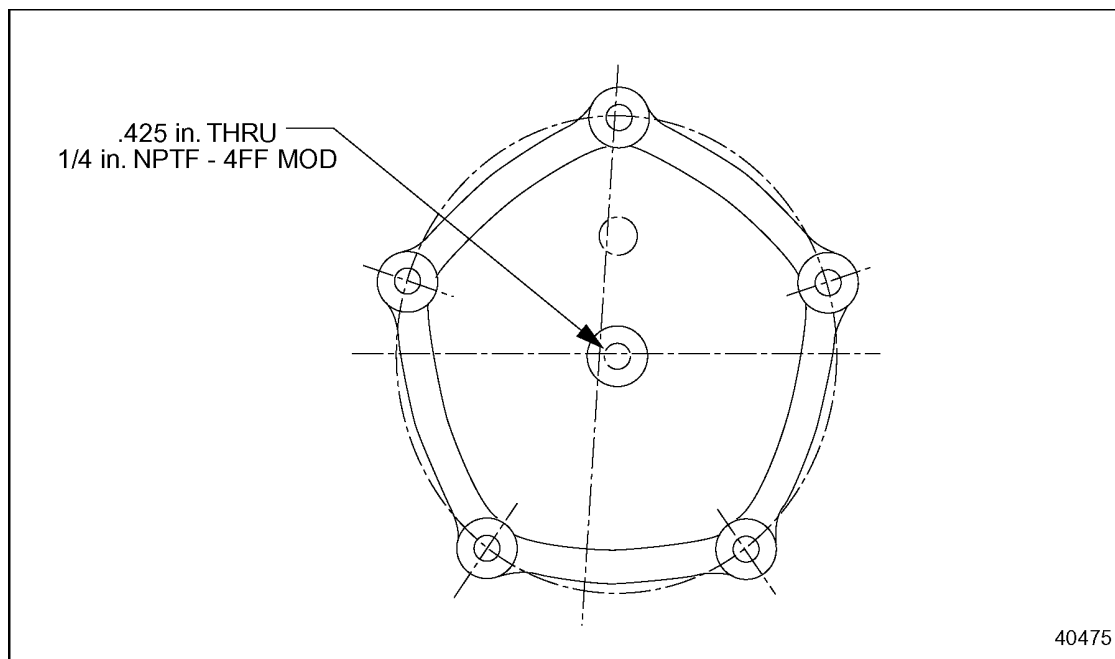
Drilled and Tapped Vent Line Hole in Front Camshaft Cover
